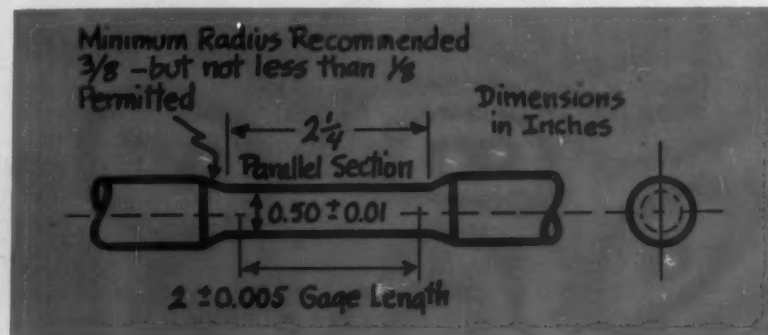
Reduced section of standard tension test specimen shall be gradually tapered with ends 0.003-0.005 in. larger in diam than center.
